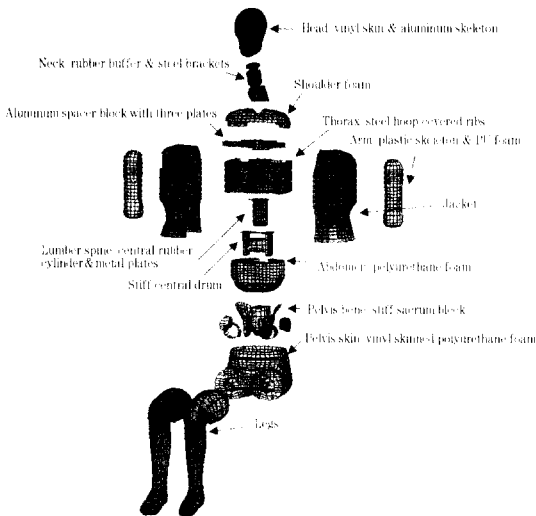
Exploded view of FE EUROSID (from ESI㈜)
